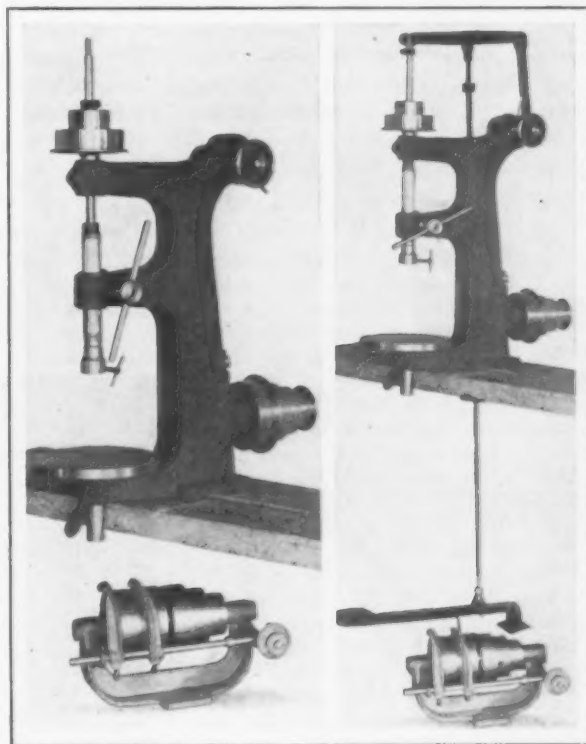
The No. 26 Machine Fig. 2—The No. 27 Machine
